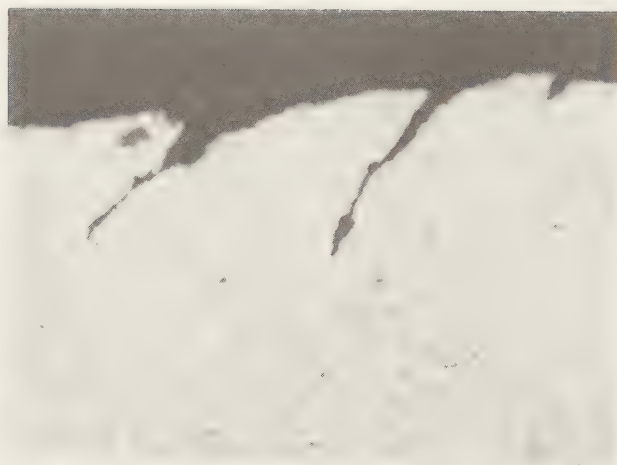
HT-disk. Section through fretting marks with crack initiation.
